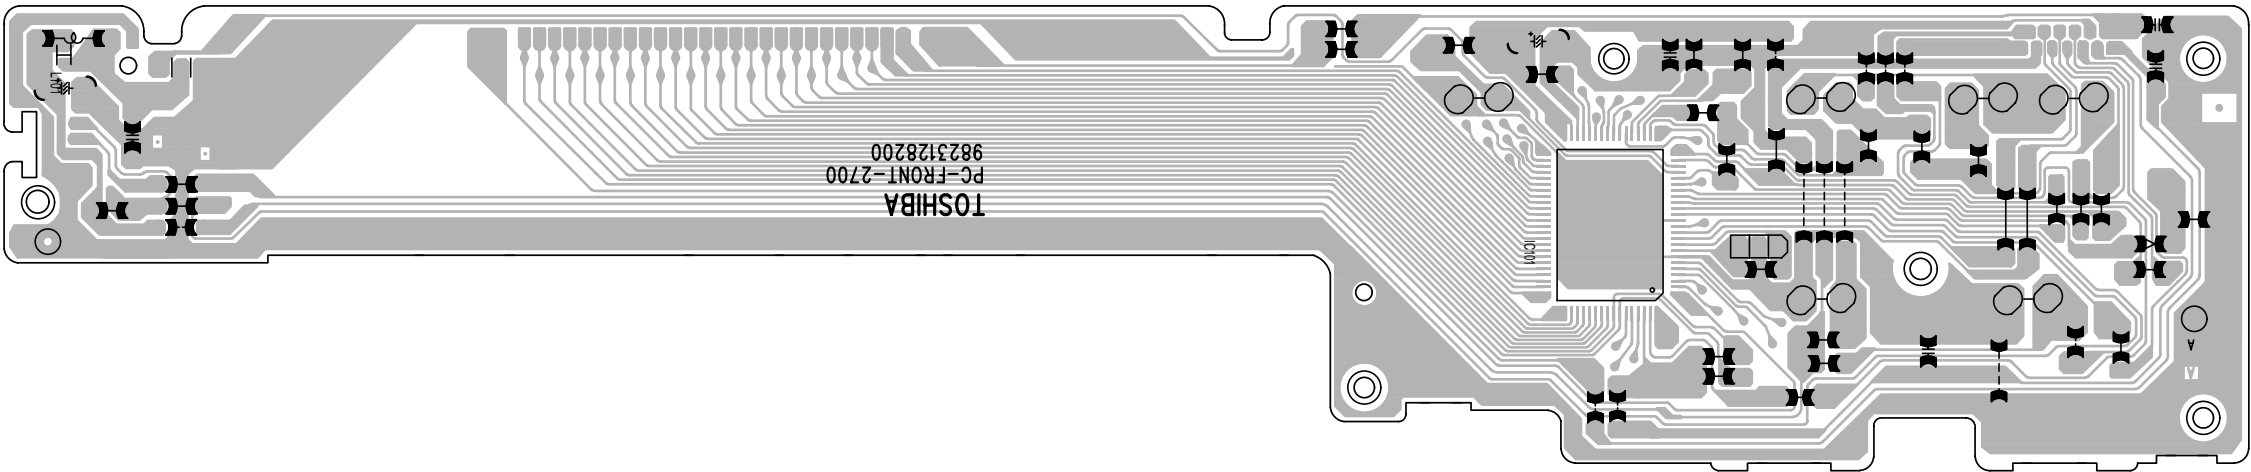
EU03 Front Display PC Board (Bottom Side)
